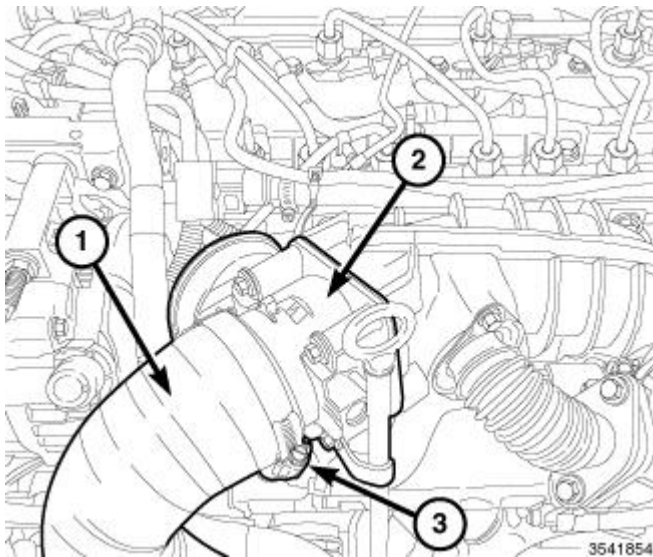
Charge Inlet Tube, EGR Air Control Valve & Clamp
